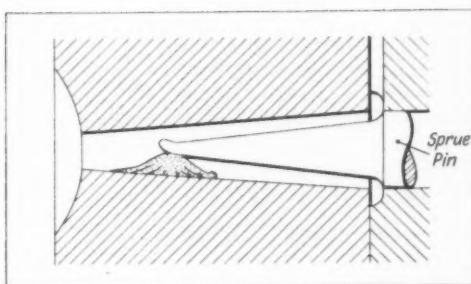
Drips in the Sprue-hole may Solidify and Damage the Sprue Pin when the Die is Closed
